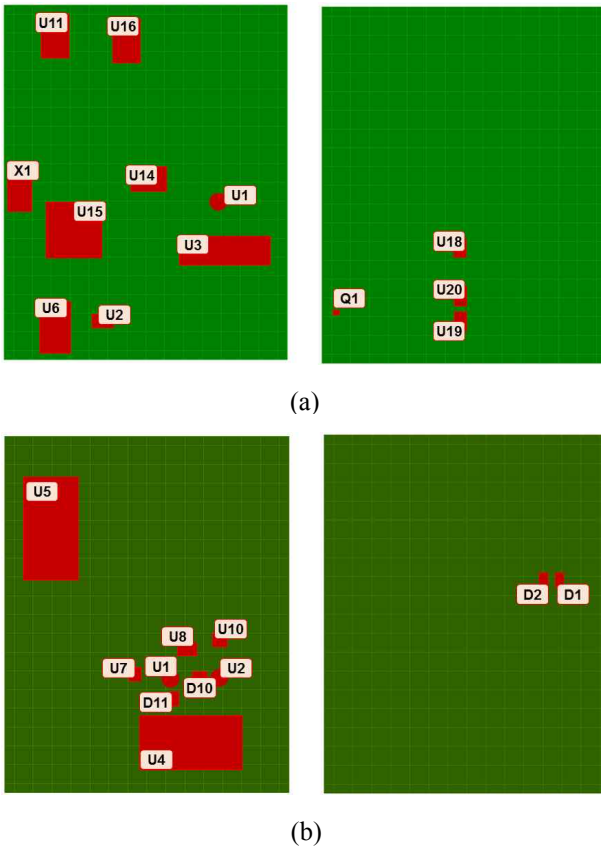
Component Position of APD [(a) Control Board, (b) Power Board]
